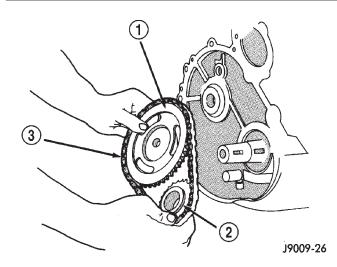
Camshaft and Crankshaft Sprockets and Chain
